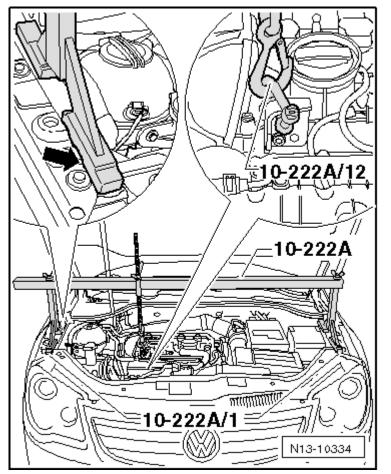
Identifying Engine Support Bridge -10-222 A- And Special Tools Courtesy of VOLKSWAGEN UNITED STATES, INC.
